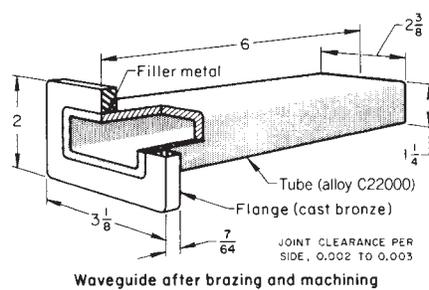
Waveguide assembly brazed by partial immersion in a molten salt bath. Alloy C22000 (commercial bronze, 90%) brazed to cast bronze; silver alloy filler metal (BAg-1). Dimensions in inches
